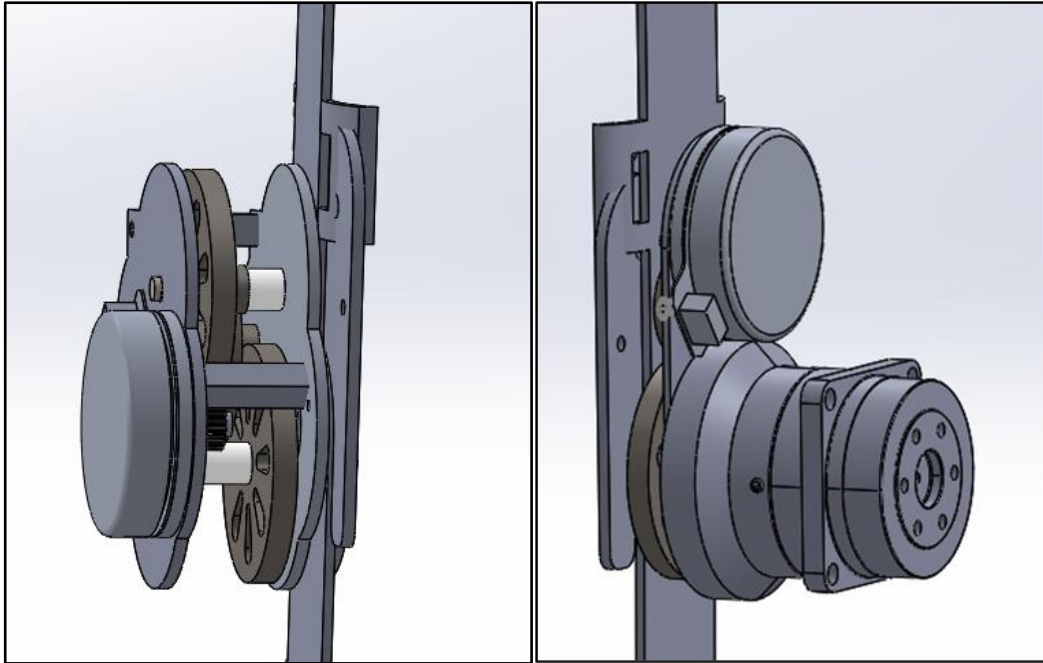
Initial Gearbox Design on the left and Planetary Gearbox on the right
